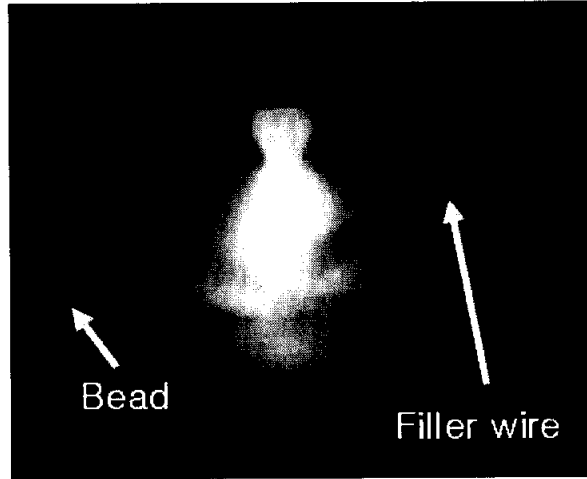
The actual image of TIG welding with a filler wire
